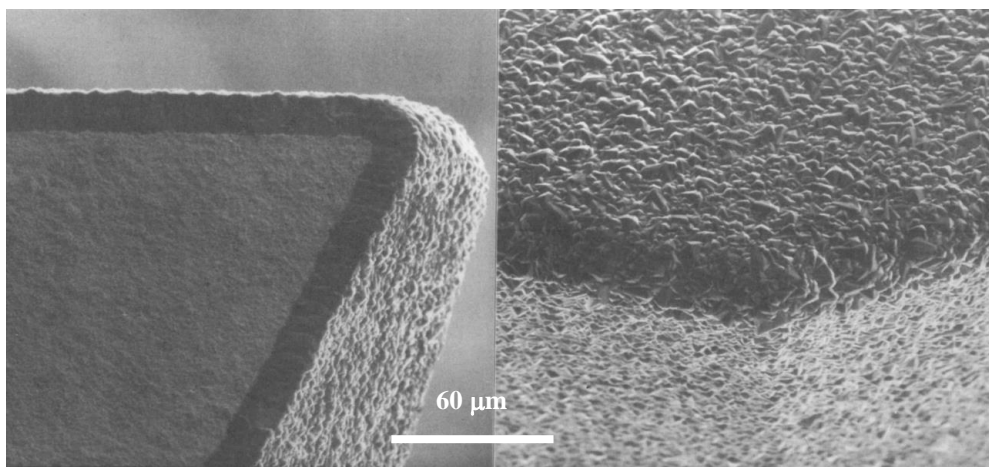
SEM micrographs of: a) the cross-section of a CVD diamond-coated cutting insert and b) the top view of the cutting tool edge [25].
